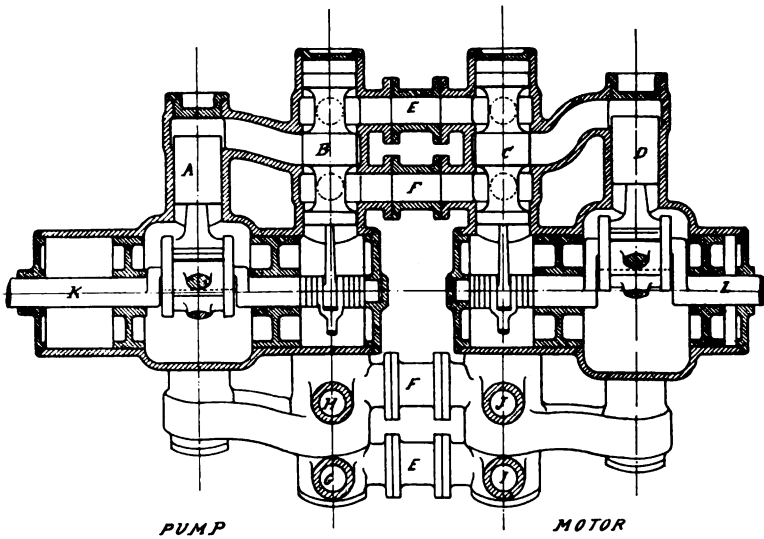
SECTIONAL ELEVATION OF PUMP AND MOTOR
